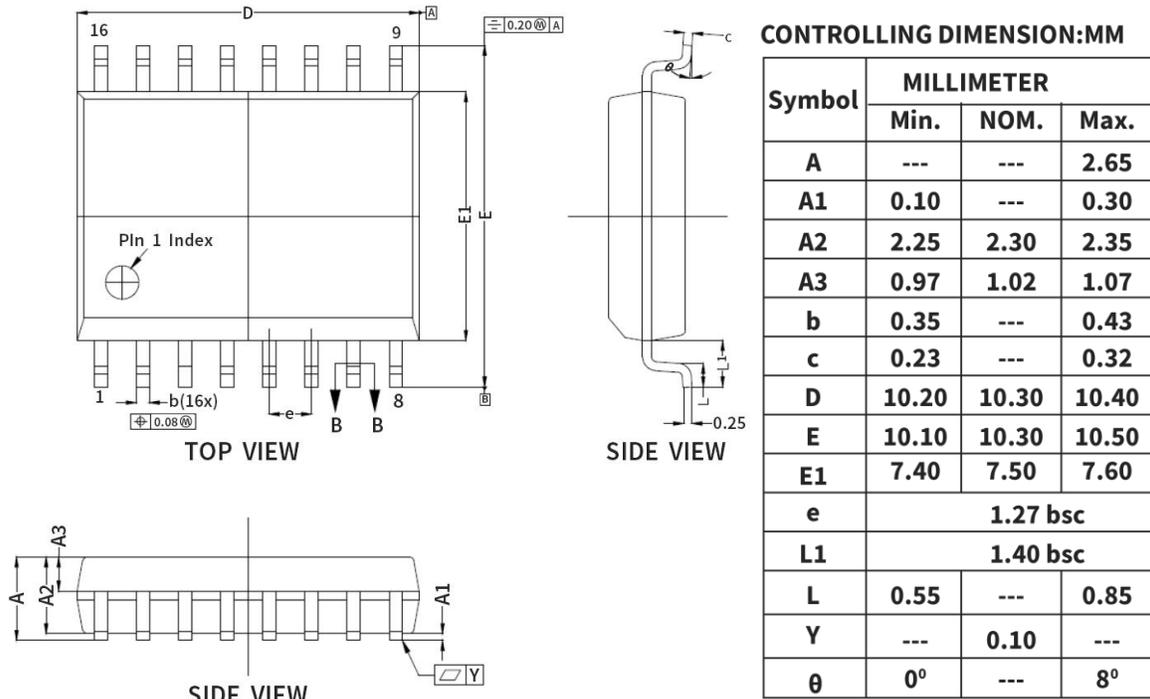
SOW16 Package Shape and Dimension in millimeters
